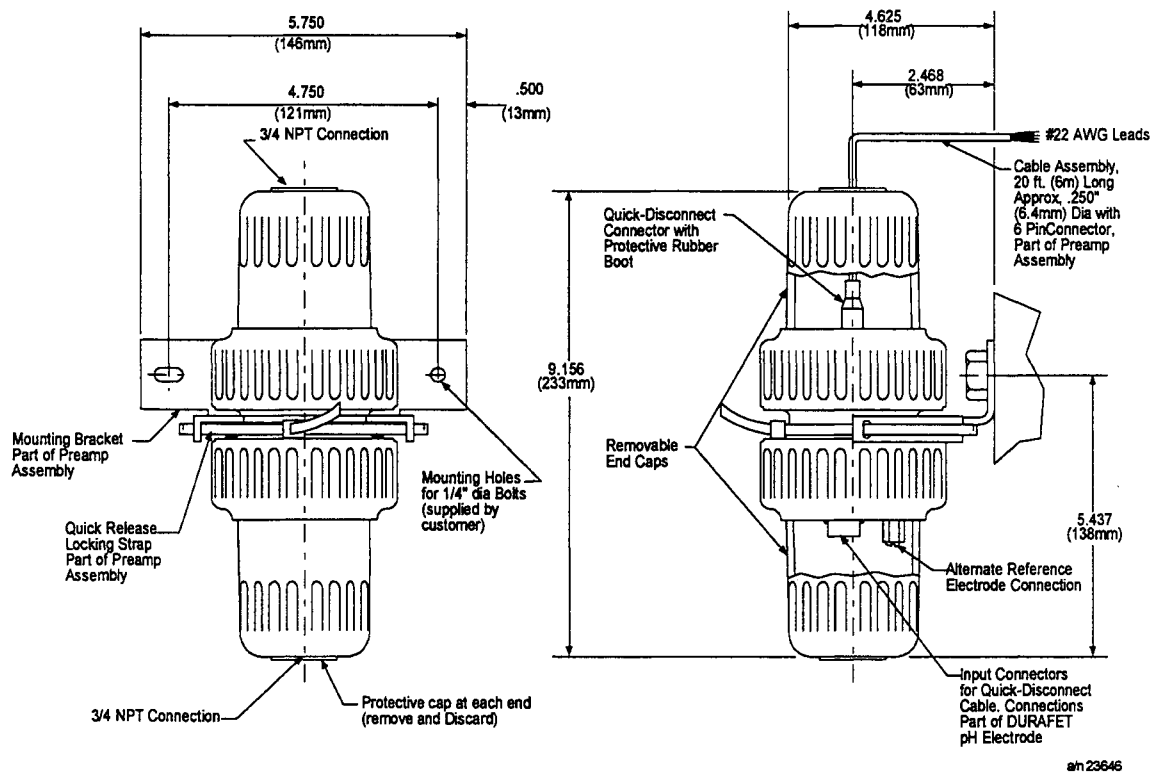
Outline and Dimension Drawing for 31079288 Preamplifier Module
